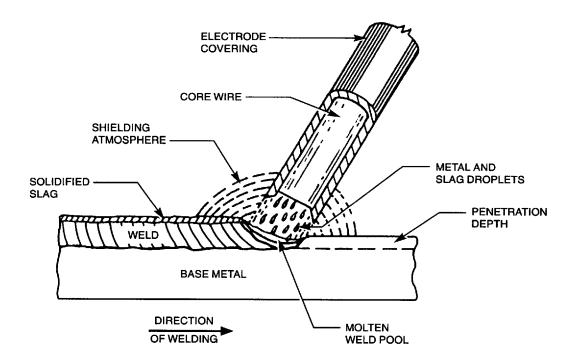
Shielded Metal Arc Welding (SMAW)
